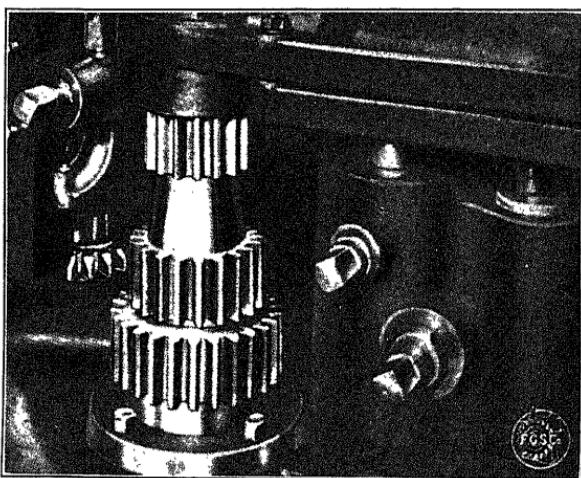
Cutting a cluster of gears on a Fellows shaper.
